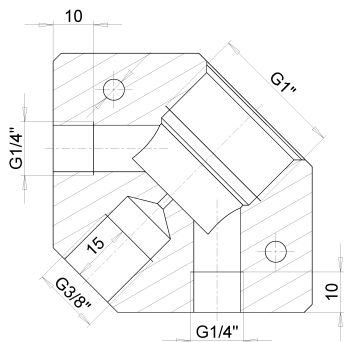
Indication of threaded mounting holes M6 for the connection adapter G 1/4" (holes on both sides)
